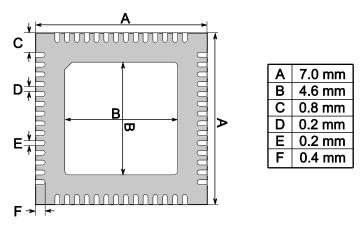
Package Drawing, QFN package, 56-pin, 7mm x 7mm (top view)
